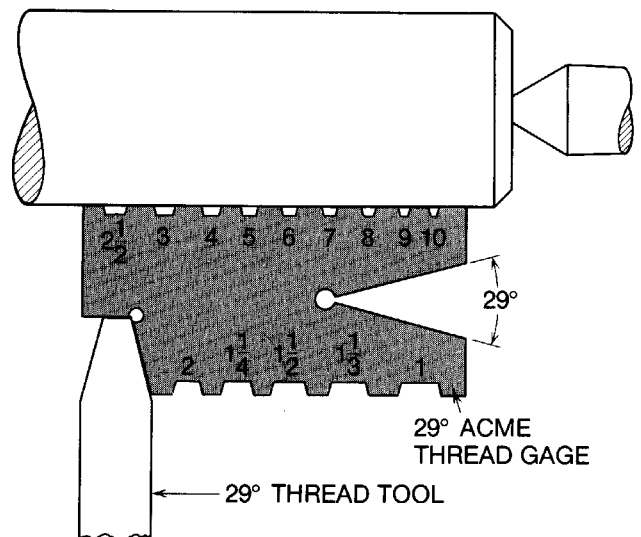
The toolbit is squared with the workpiece by an Acme thread gage.
